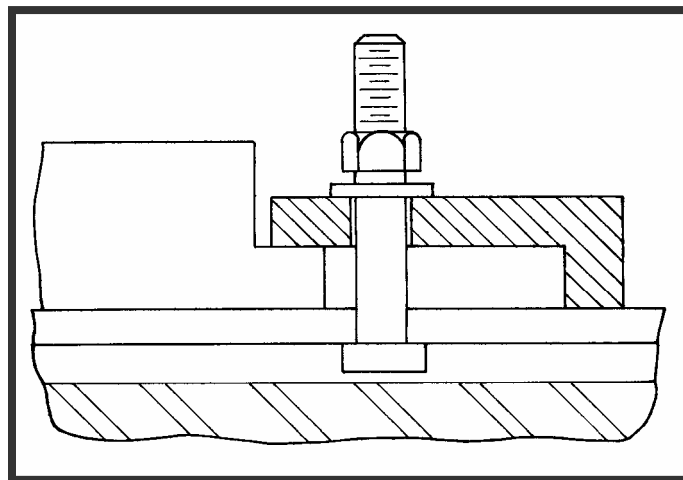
If too long a bolt is used, nut may bottom on the end of the threads and not actually hold the clamp in place. *Smith & Associates
